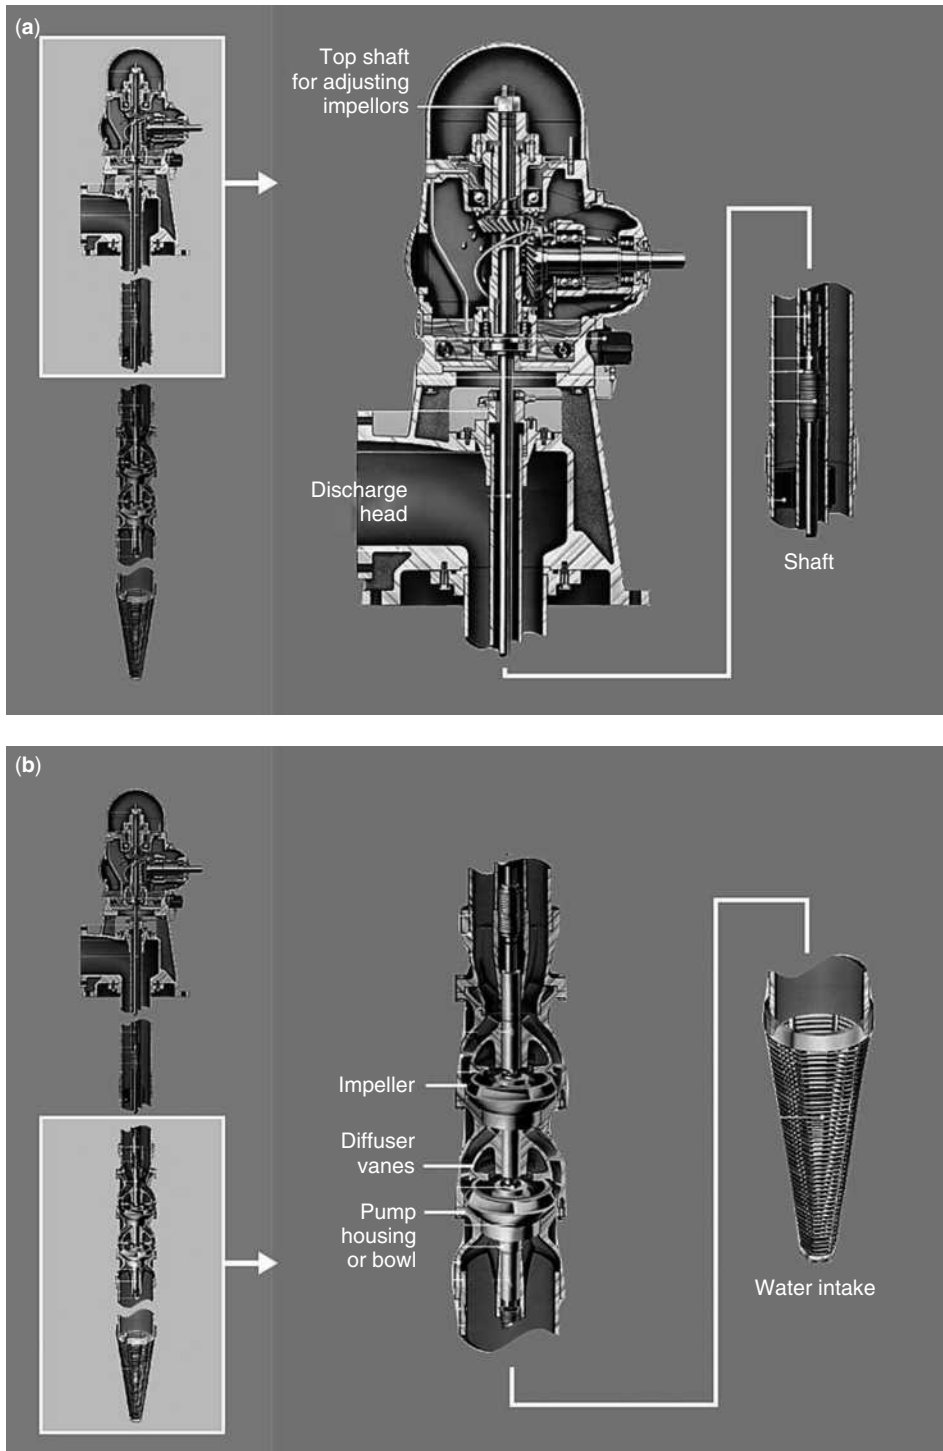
Cutaway of a deep-well turbine pump that shows (a) the pump head, gear head, and shaft; and (b) pump housing, impellers, and shaft. [Source: Hanson (1)].
